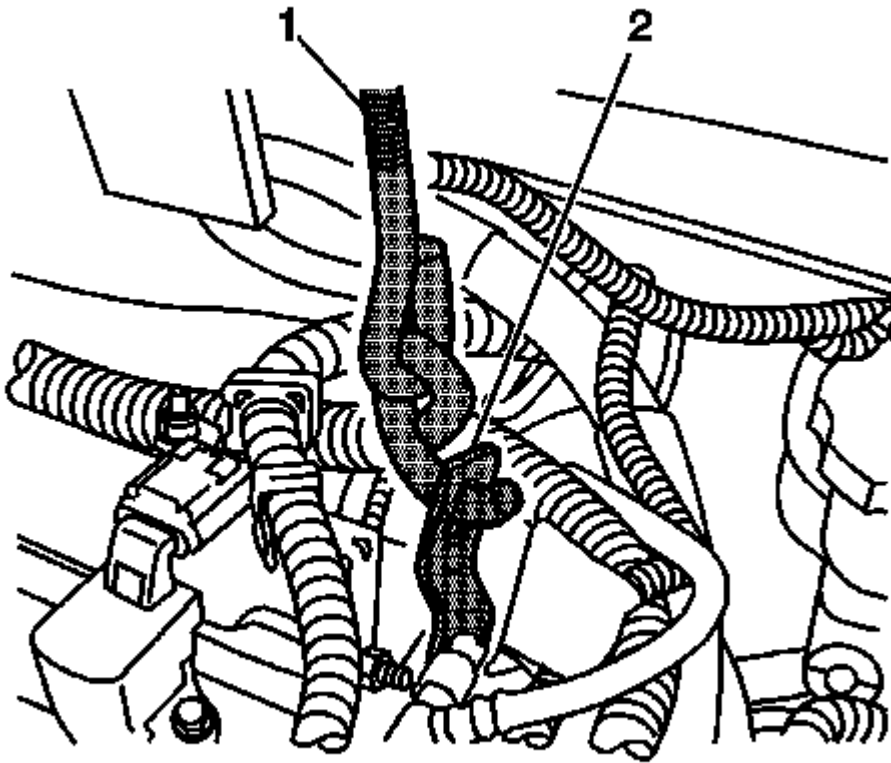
Inserting Lift Hook Through Engine Rear Lift Bracket
